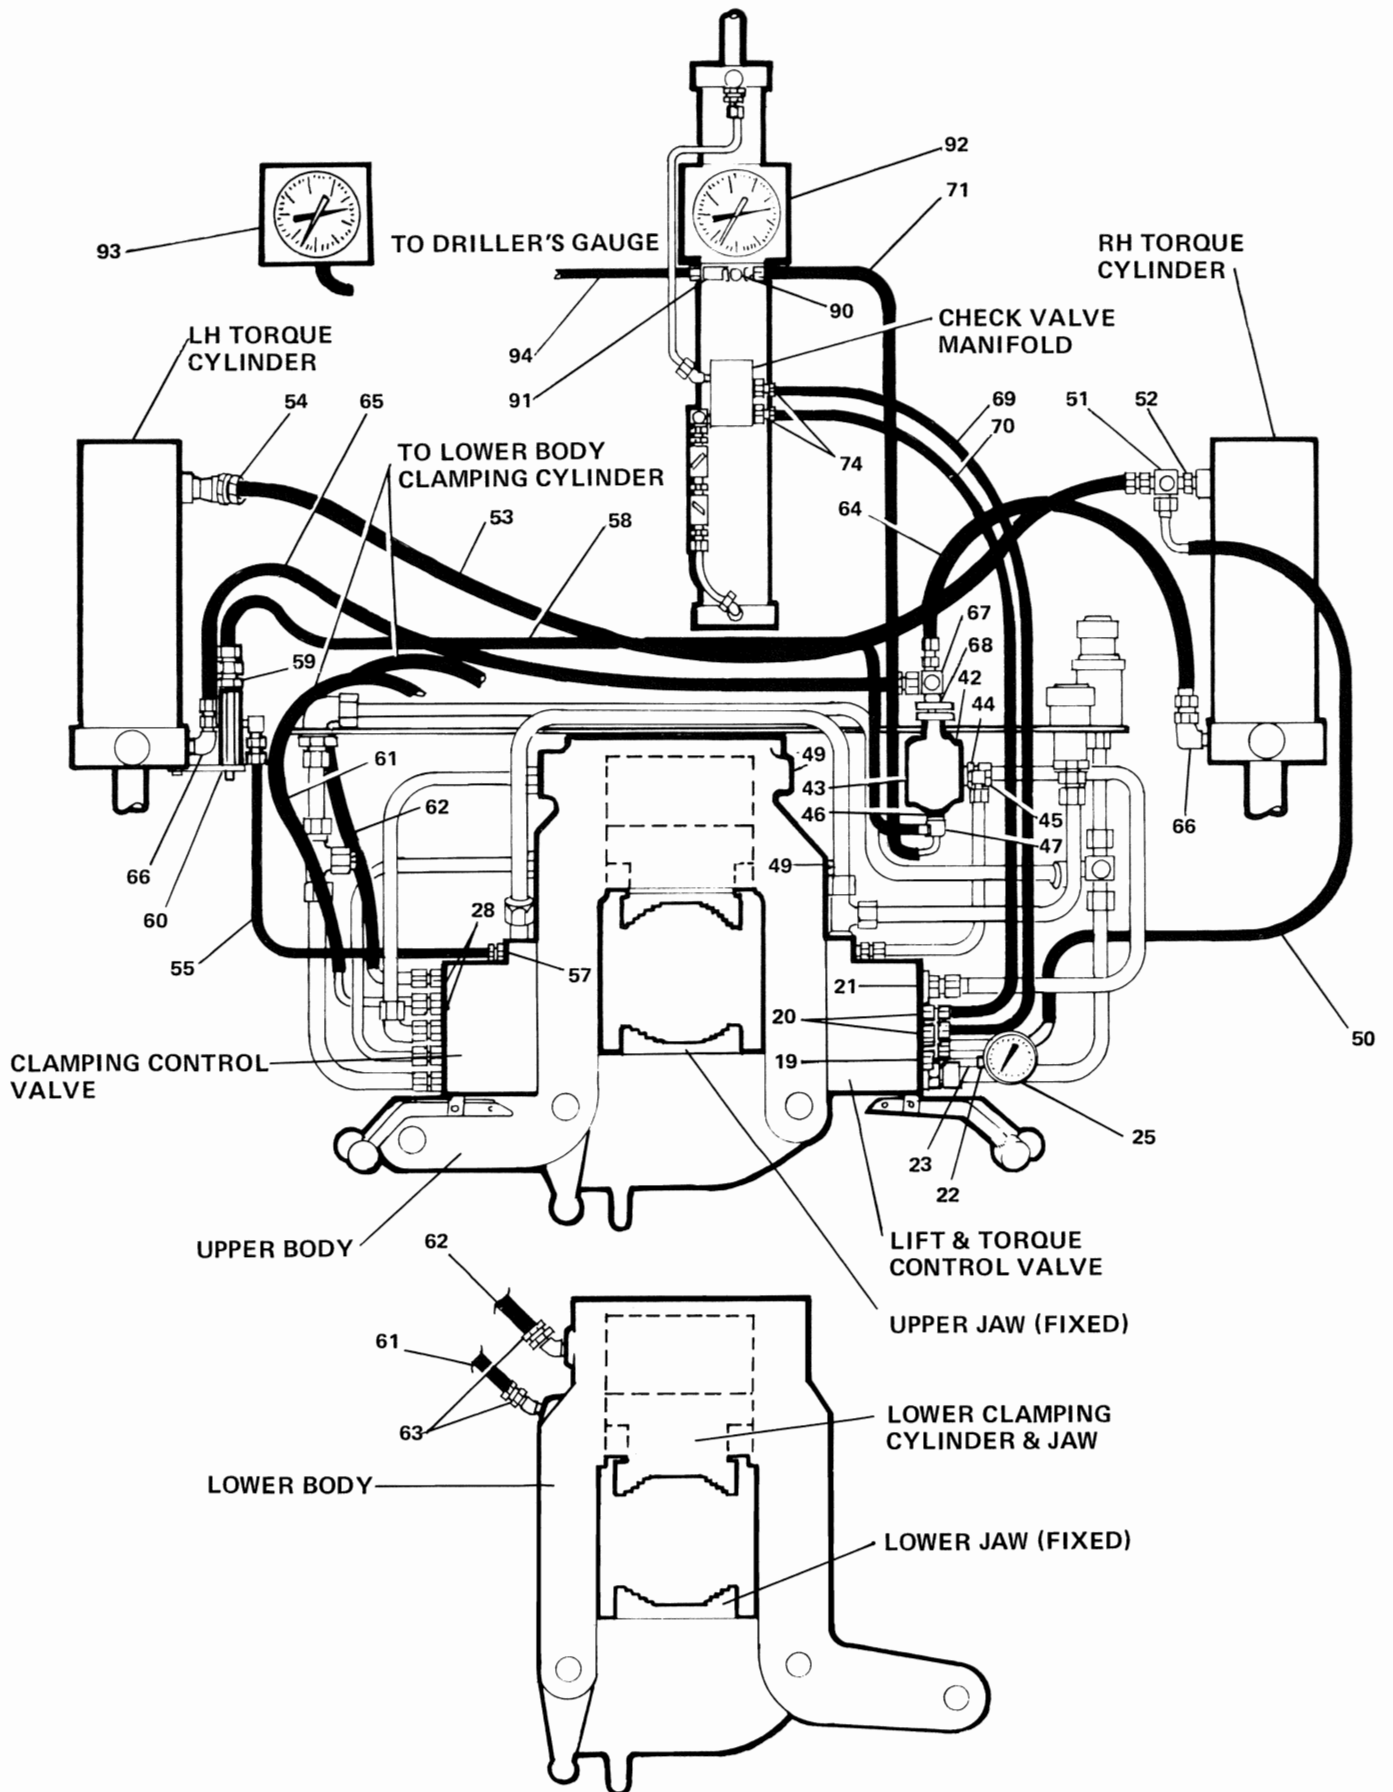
Hydraulic Hoses, Tubes and Fittings (Continued)
